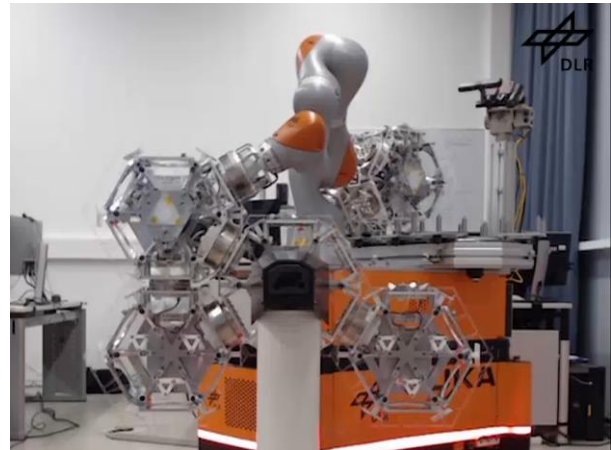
PULSAR: mobile robotic manipulator performing the assembly of a primary mirror. Credit: DLR.
